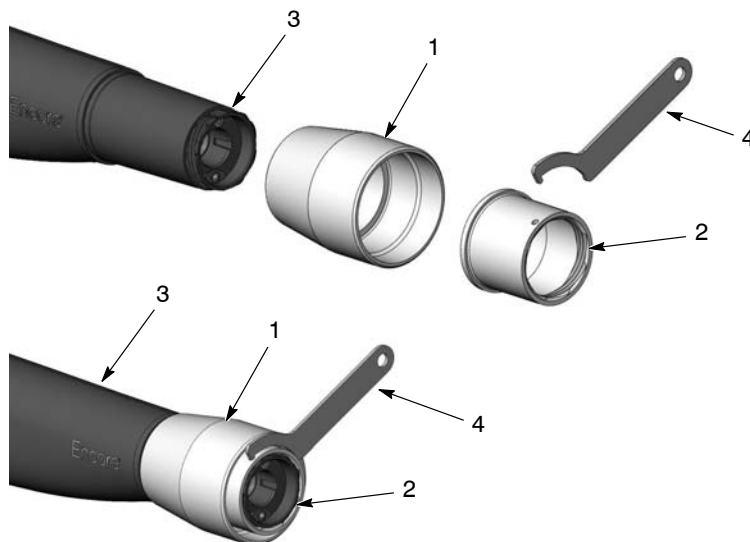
Installing the Body and Retainer Nuts onto the Spray Gun
